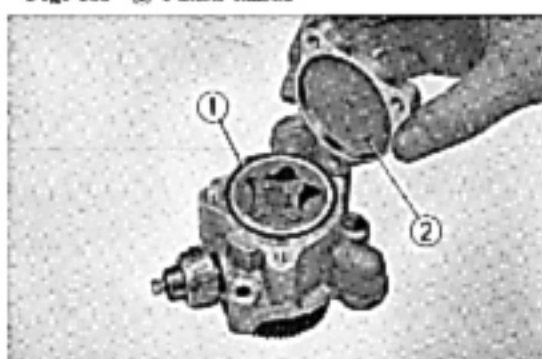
① 47 mm O-ring ② Oil pump cover
